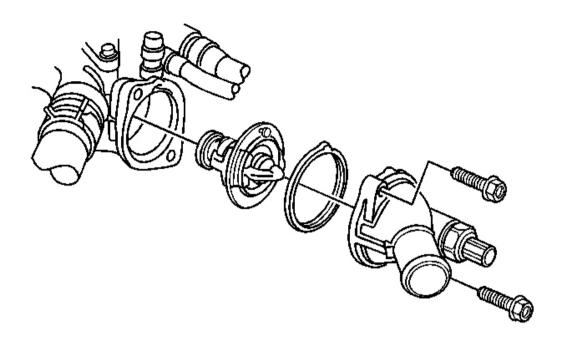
View Of Thermostat With Housing Courtesy of GENERAL MOTORS CORP.
